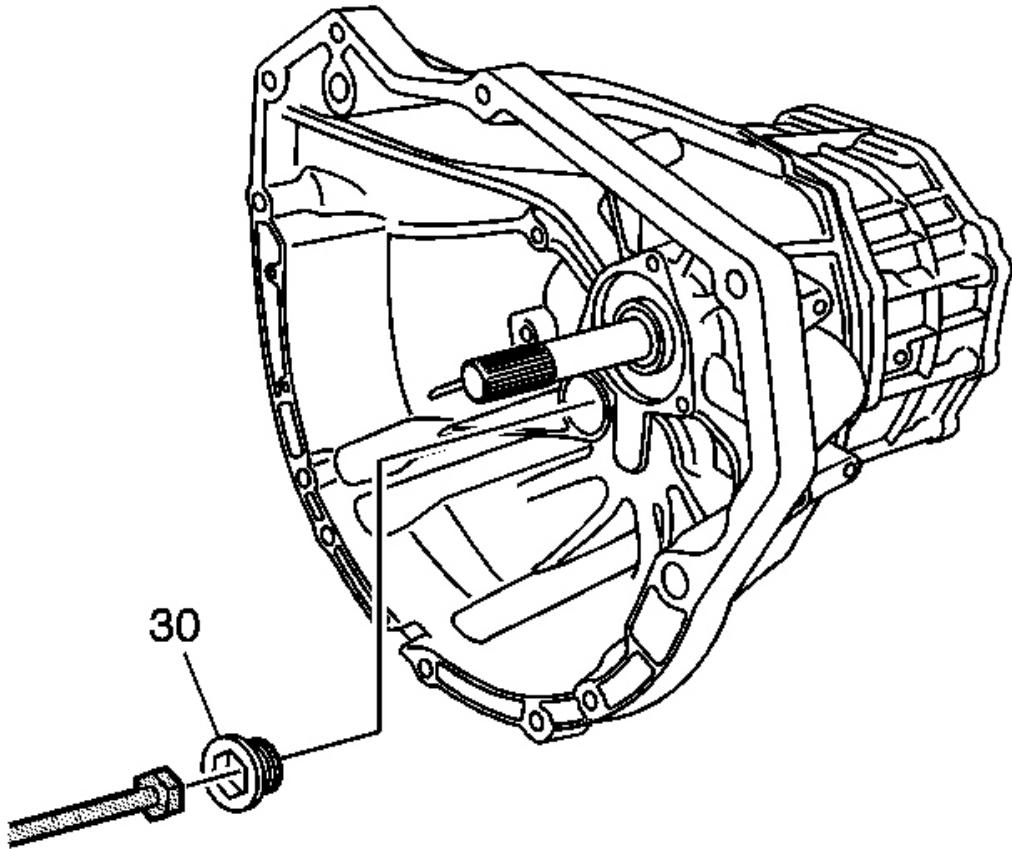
Removing/Installing Clutch Housing Hole Plug
